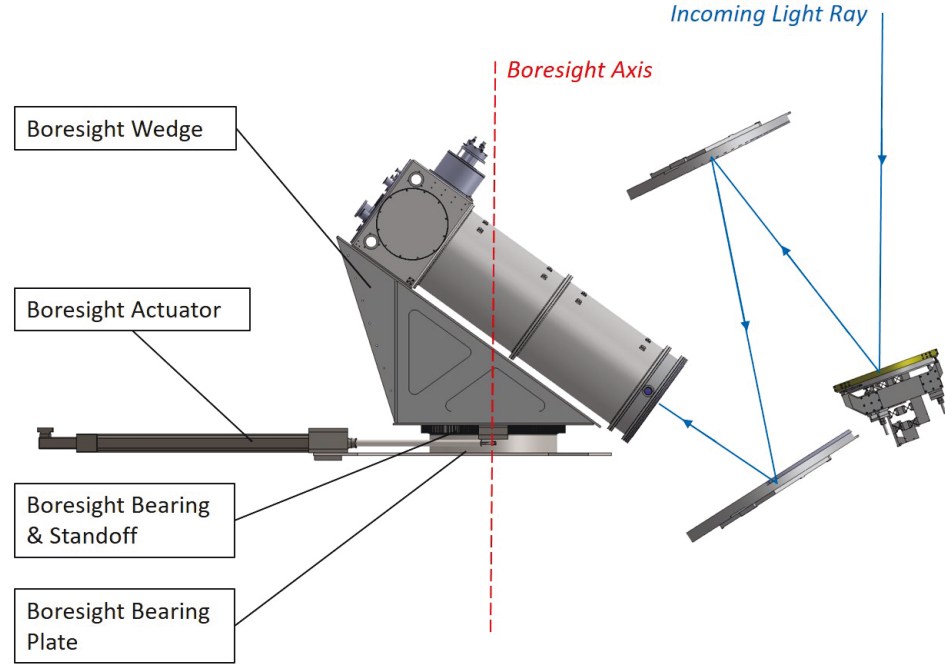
The boresight wedge optical role is presented in this figure. Components in the boresight wedge assembly are indicated in black text from another perspective. The boresight bearing and standoff are visible in this figure. The boresight axis and the outgoing light ray are also shown. They are designed to be parallel, which is realized by the boresight wedge. The telescope is pointing at 90-degree elevation with 0-degree boresight in this figure.
